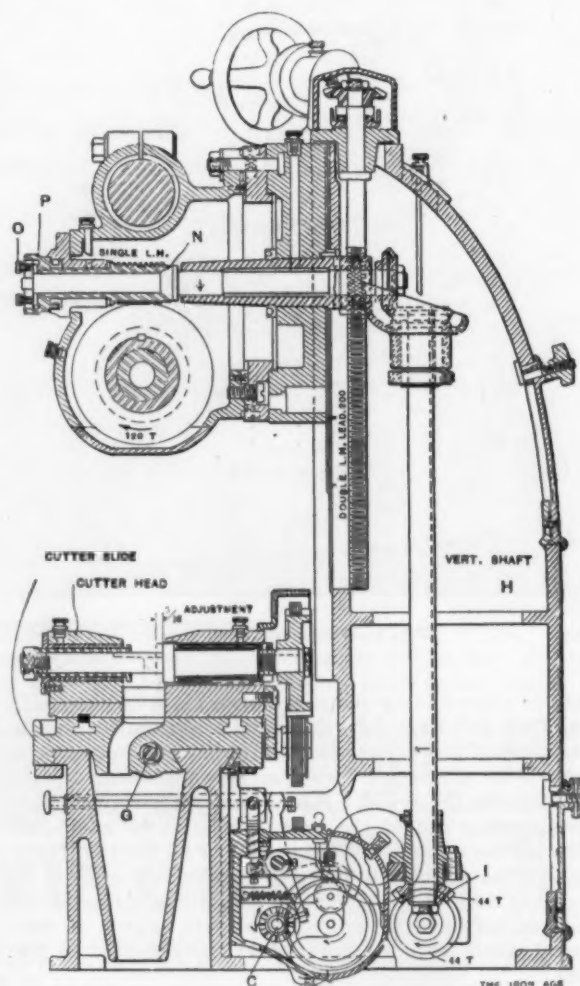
Sectional Elevation of the Machine Above the Base.
